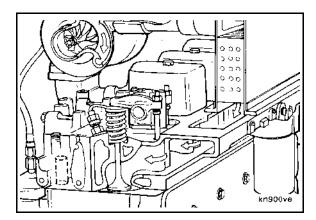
CYLINDER HEAD CAST INTAKE MANIFOLD, THERMOSTAT HOUSING, AND WATER BYPASS
